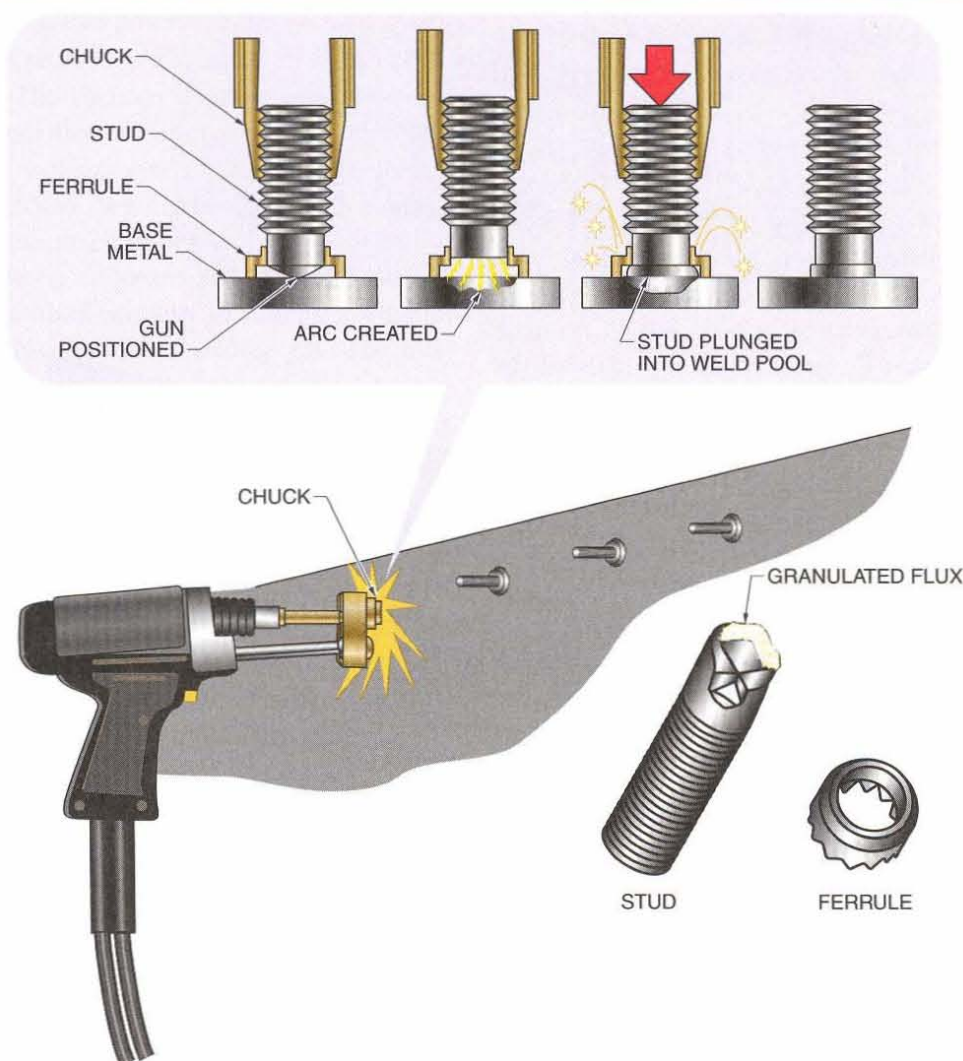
A stud is loaded into the chuck of the gun and a ferrule is positioned over the stud. As the stud contacts the workpiece, an arc is started that melts the end of the stud and an area on the workpiece to which the stud is welded.
